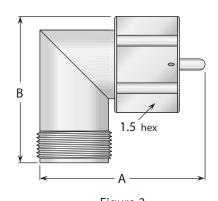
(Right angle plug-jack; connects one plug and one jack)
